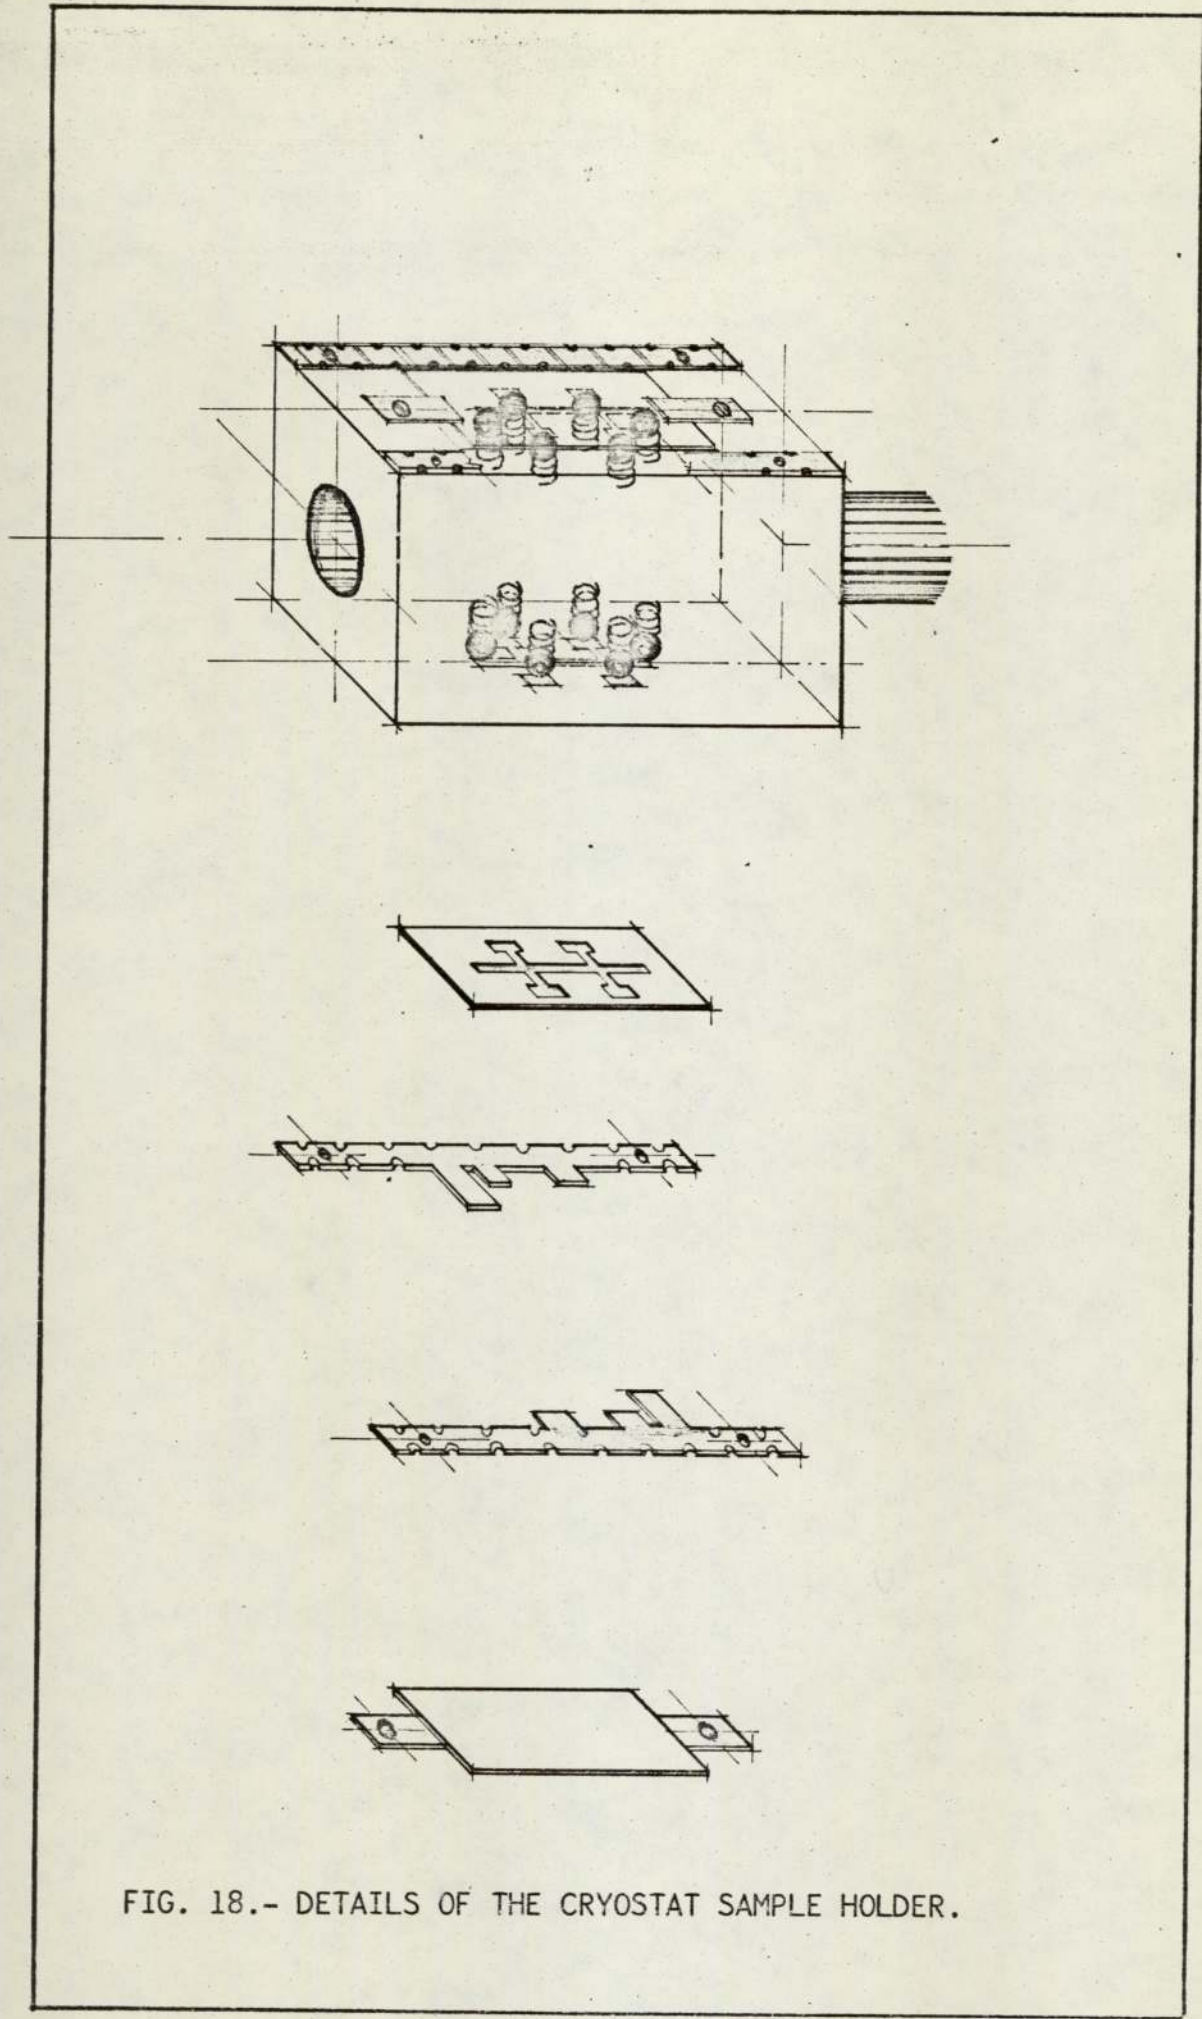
DETAILS OF THE CRYOSTAT SAMPLE HOLDER.
